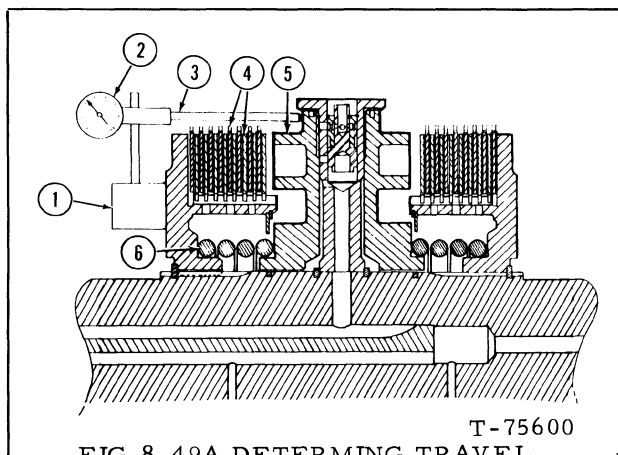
A DETERMINING TRAVEL OF APPLY PISTON
